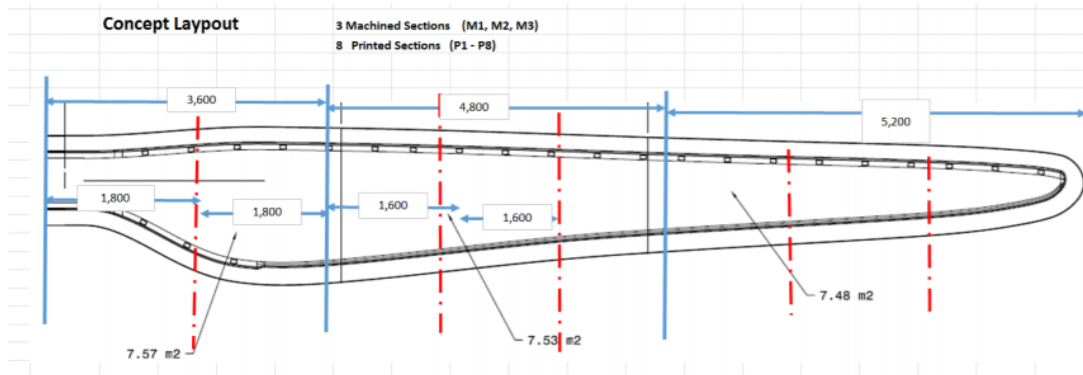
Illustration of blade mold cut into manageable printing sections, Source: ORNL
